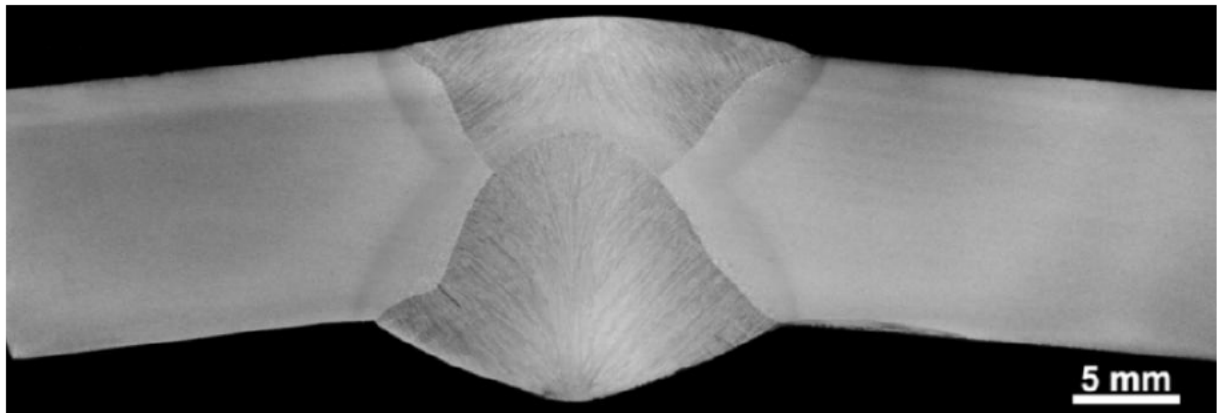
Macrograph of the structures present in the seam weld of the X60A steel pipe.
